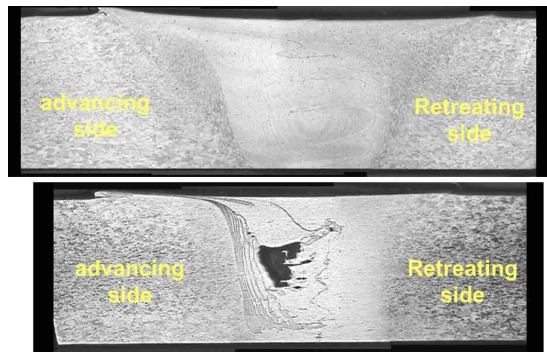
The general position of defects after FSW is shown. The defects are usually formed at the end of flow; it ends at the advancing side of the weld.
